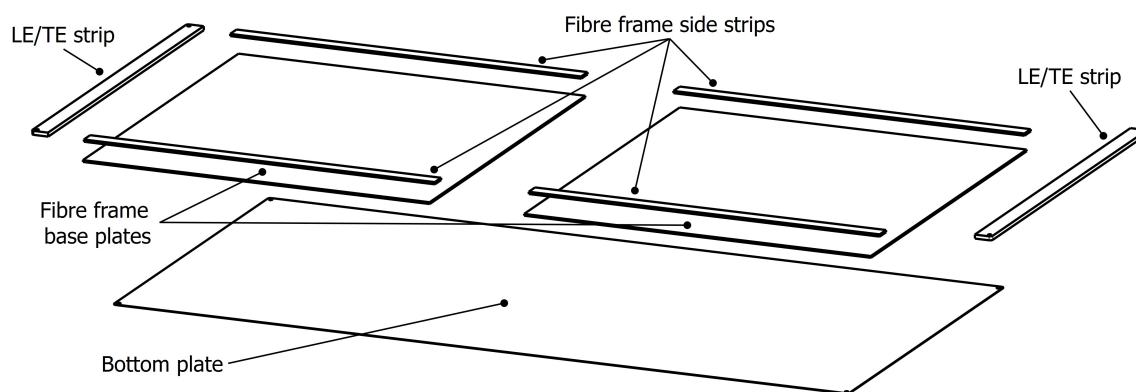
Schematic exploded view of continuous fibre test plate aluminium mould.
